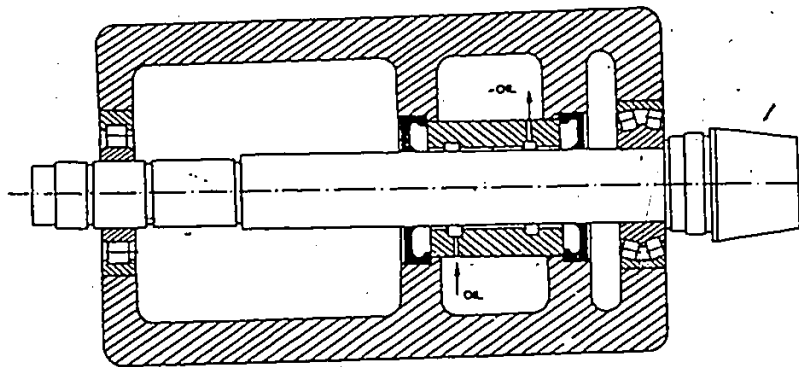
Relative Viscous Damper of Spindle of a Lathe
